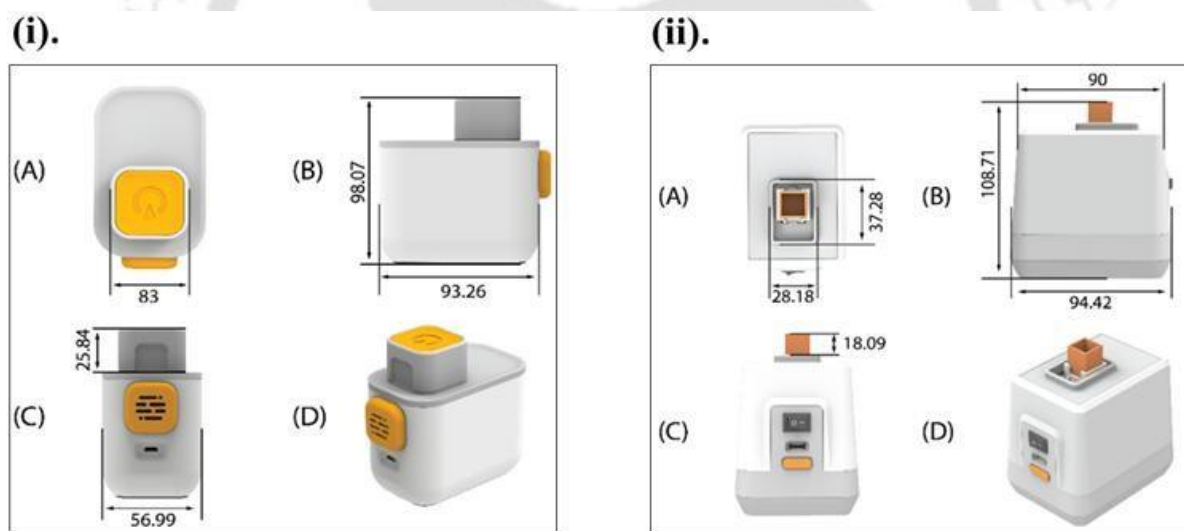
Mobilab-Uni analyzer and Mobimix mixer: orthographic views and key dimensions. (i) Mobilab-Uni device: (A) Top view showing the device cap with a breadth of 83 mm. (B) Side view indicating a length of 93.26 mm and a height of 98.07 mm. (C) Front view displaying the ambient sensor and data port. (D) Isometric view highlighting the cap, sensor, and data port arrangement. (ii) Mobimix mixer: (A) Top view of the cuvette holder, measuring 37.28 mm in length and 28.18 mm in breadth. (B) Side view showing a length of 94.42 mm and a height of 108.71 mm. (C) Front view featuring the On/Off switch, mode selector, and charging port. (D) Isometric view illustrating the On/Off switch, cuvette holder with inserted cuvette, mode switch, and charging port.
